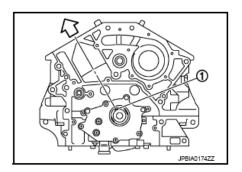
Identifying Crankshaft Key Courtesy of NISSAN NORTH AMERICA, INC.
